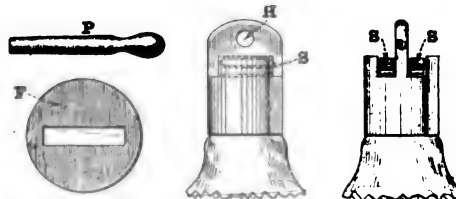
DETAILS OF LAMP CAP, FIBRE PLATE AND WOODEN PIN.
